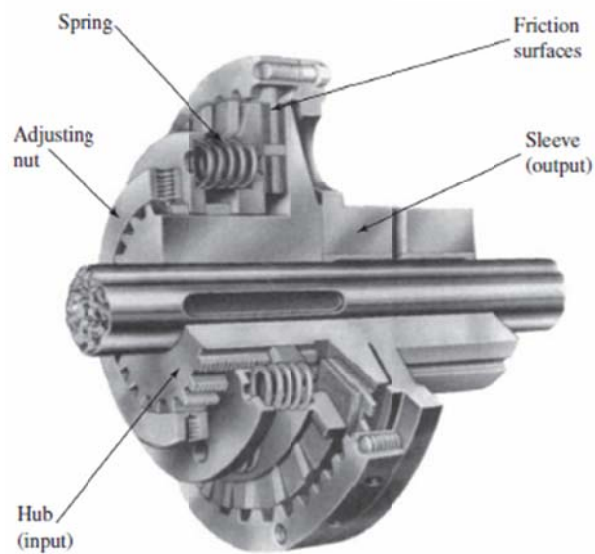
Slip clutch. Springs apply normal pressure on the friction plates. The spring force is adjustable to vary the torque level at which clutch will slip
